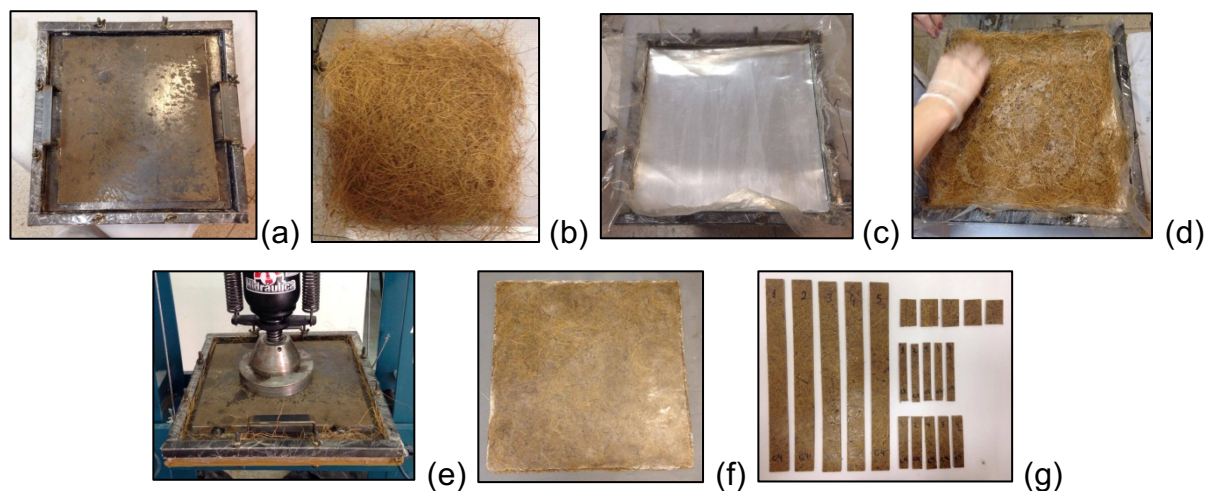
Fabrication process of the composites: (a) metallic mould, (b) fabric of random coir fibres, (c) aluminium plate, (d) fabric arranged inside the mould, (e) cold pressing, (f) composite plate and (g) specimens for testing.
